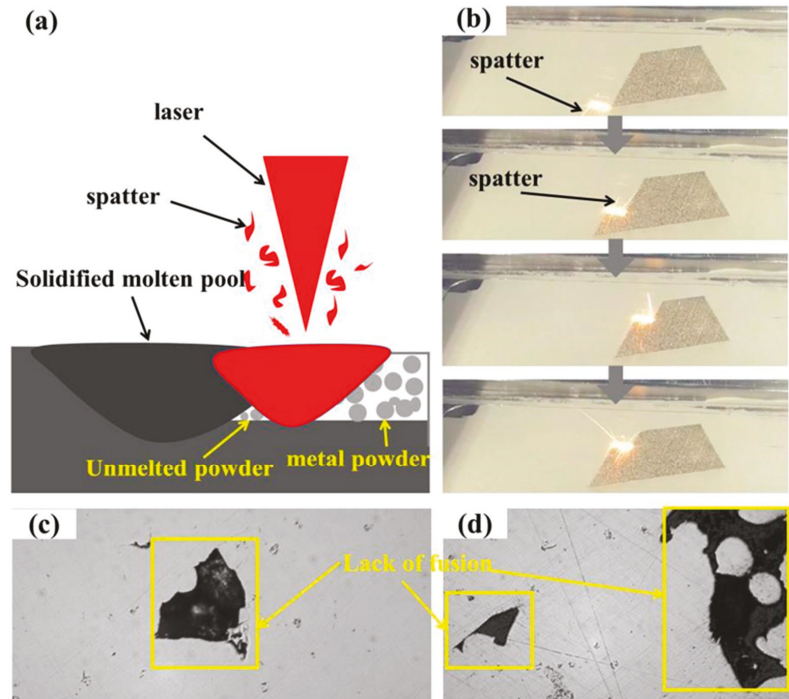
Mechanism of spatter and incomplete fusion in SLM forming process: (a) laser scanning single channel metal powder model, (b) forming process, (c) lack of fusion, (d) lack of fusion with unmelted metal powder.
